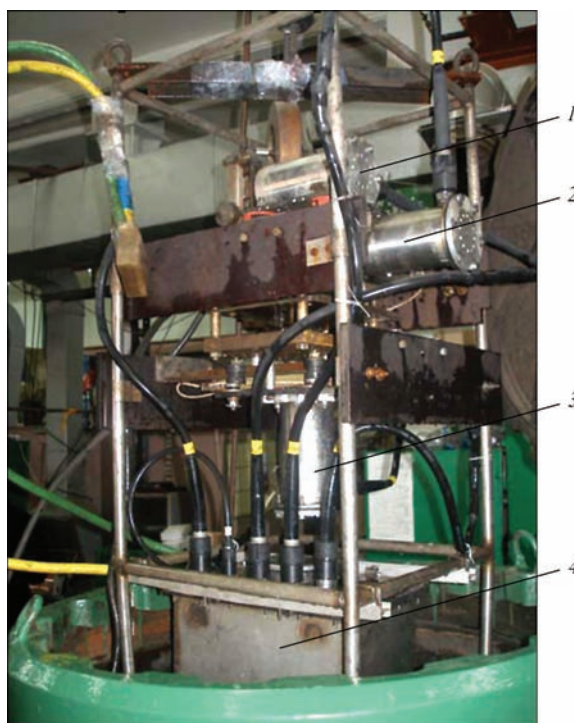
Automatic machine for welding-surfacing under the water with electric motors of mechanisms of: 1 — longitudinal; 2 — transverse displacement; 3 — electrode wire feed; 4 — immersible control block
